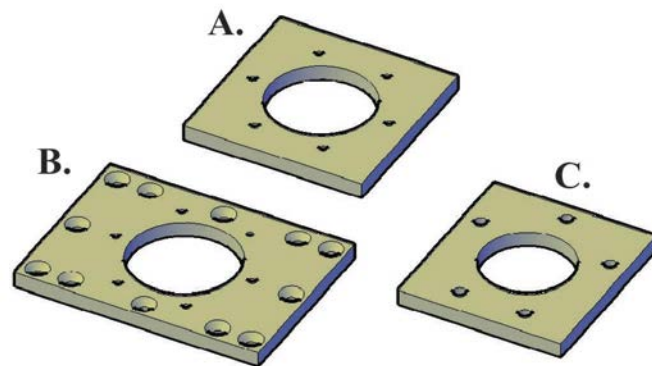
Steady Flow Setup Adapter Plates: A. PVC Section 1 to Plenum, B. Plenum Adapter, C. PVC Section 1 to Combustion Chamber.
